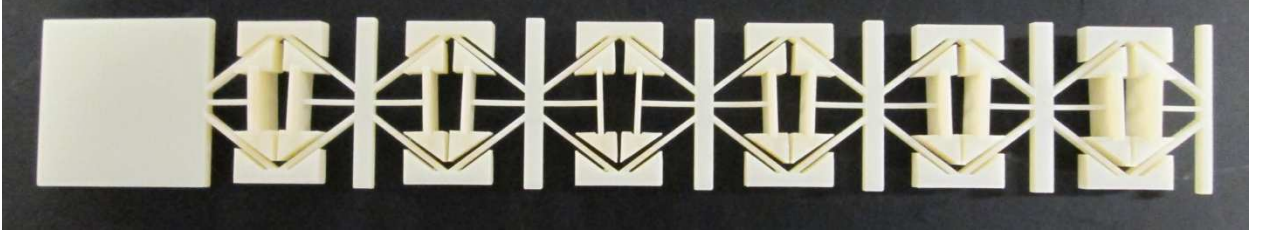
Type 3 SN metamaterial manufactured by a 3D printer
